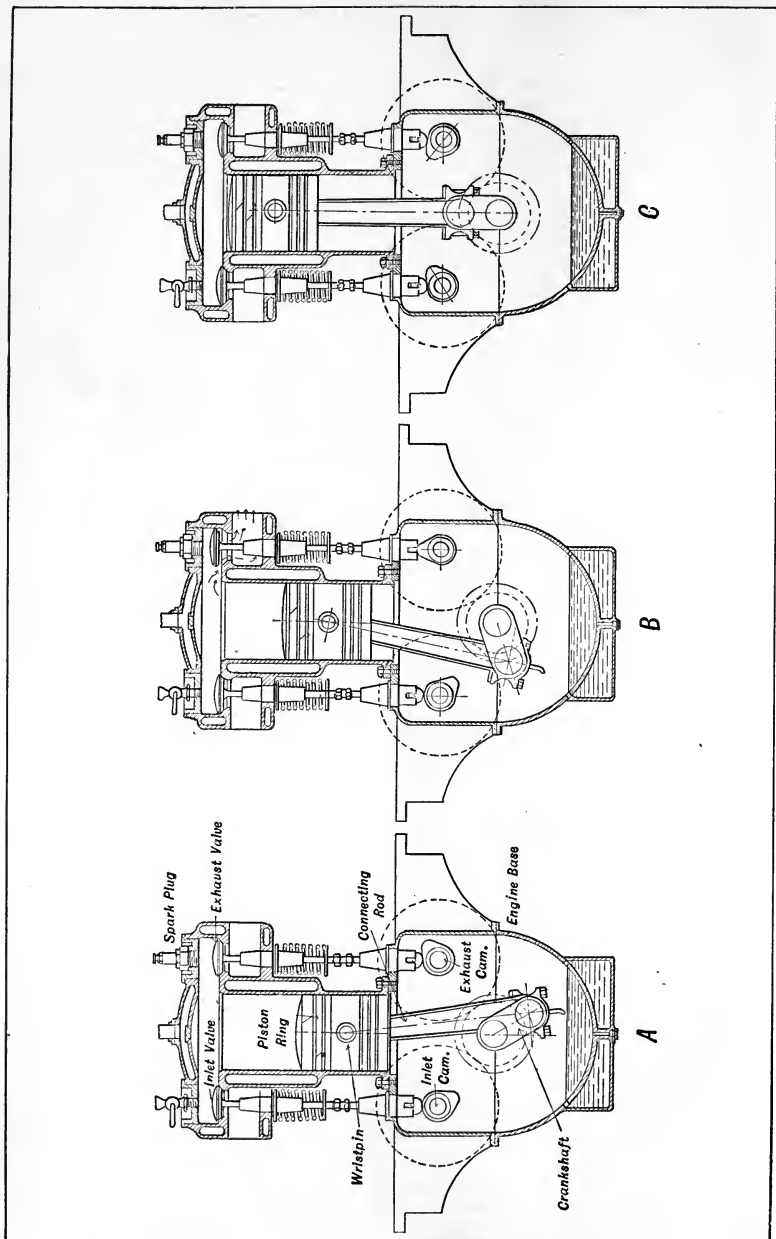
Showing Action of Exhaust Valve of Conventional Motor Type.
